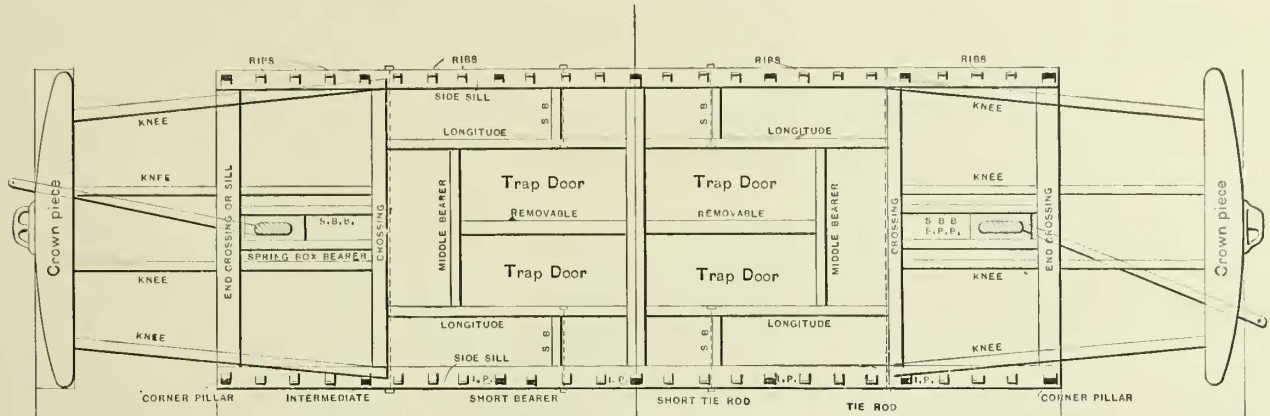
FLOOR FRAME FOR ELECTRIC CAR.
